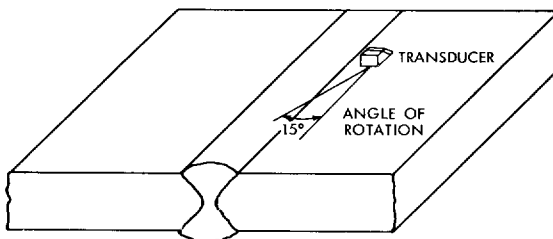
SUPPLEMENTARY TECHNIQUE FOR INSPECTING BUTT WELDS WHEN THE WELD BEAD IS NOT GROUND FLUSH
